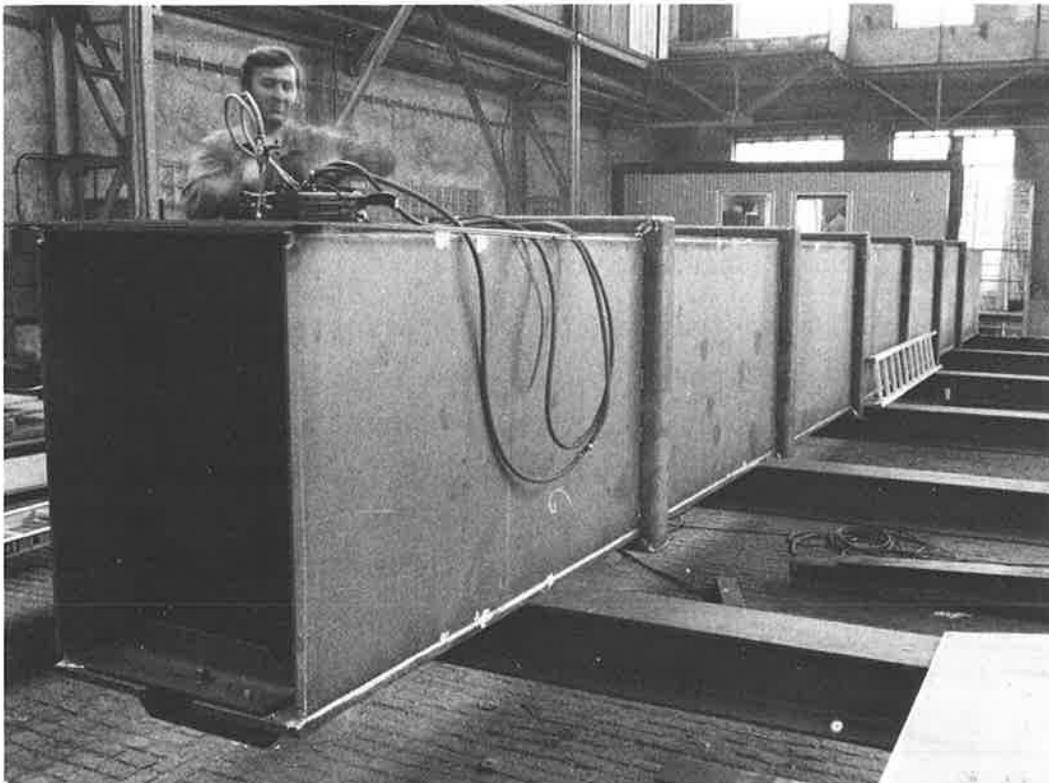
PREFABRICATION OF TRACK BEAM
